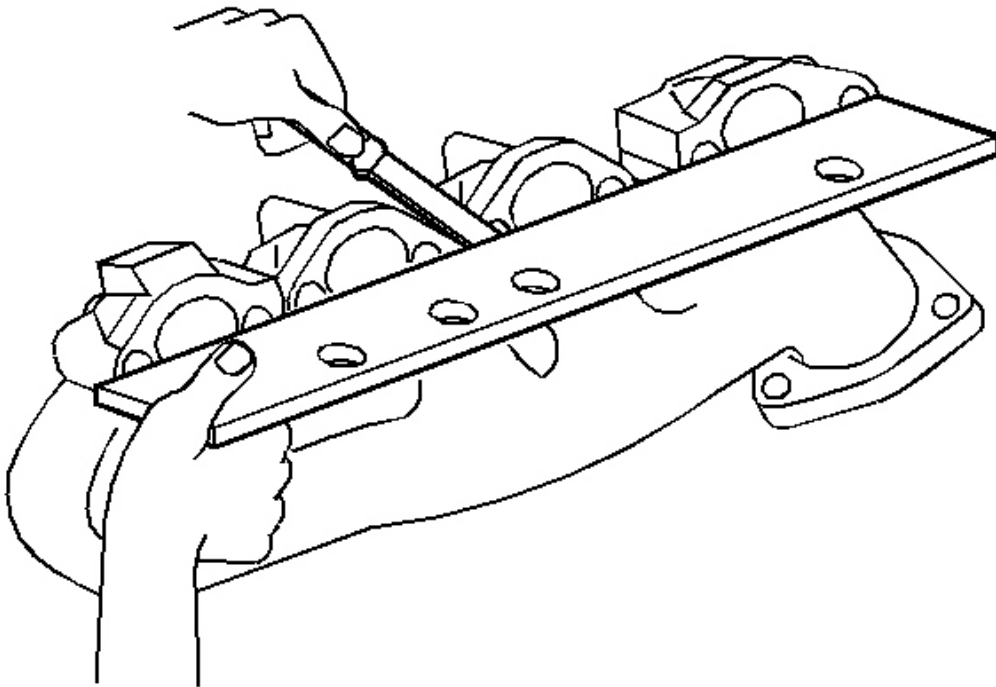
Measuring Exhaust Manifold To Cylinder Head Surface For Warpage
